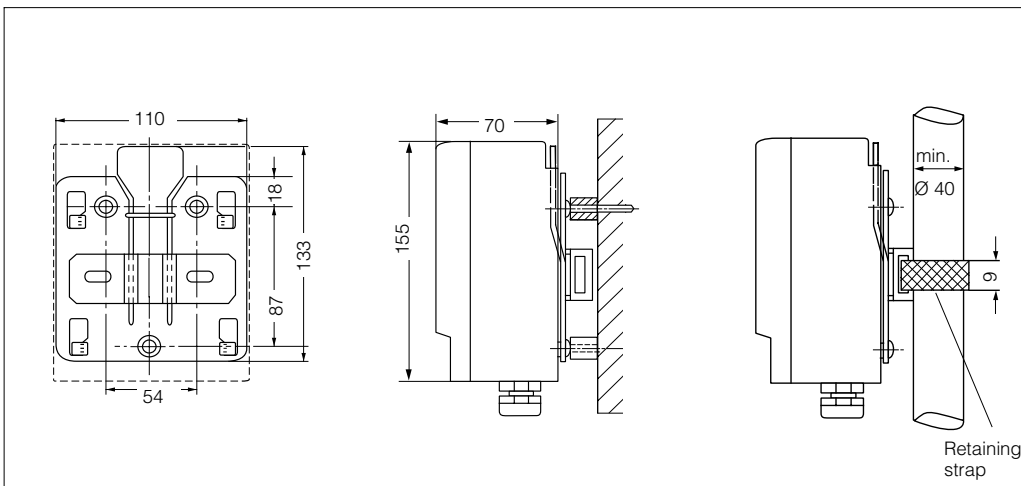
Mounting plate for wall and post mounting of separate measuring transmitter
